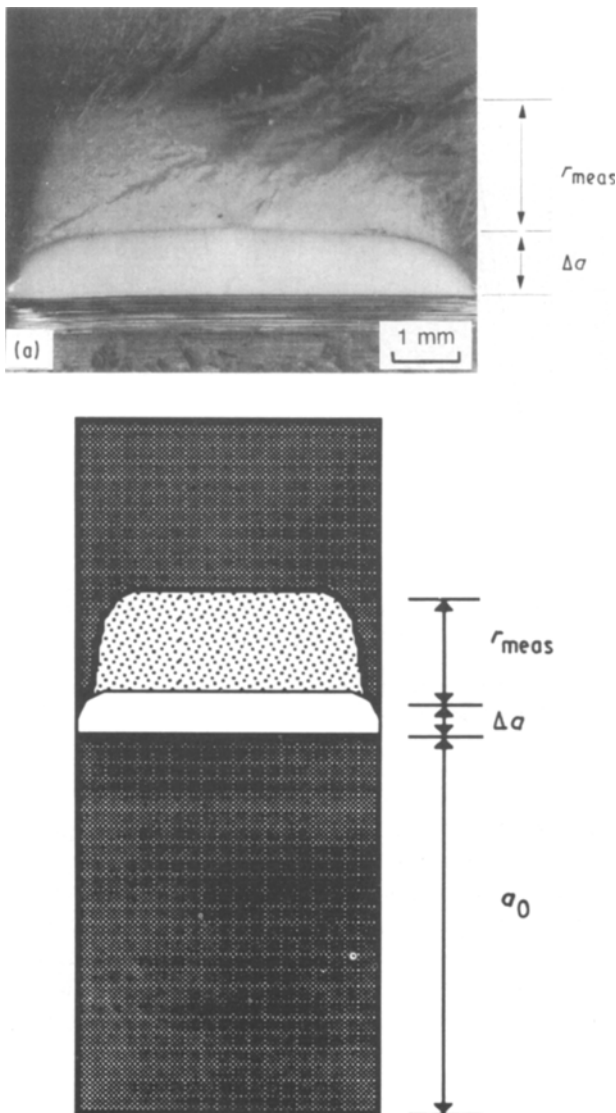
(a) Optical micrograph of a typical fracture surface. (b) Schematic diagram of a typical fracture surface.
